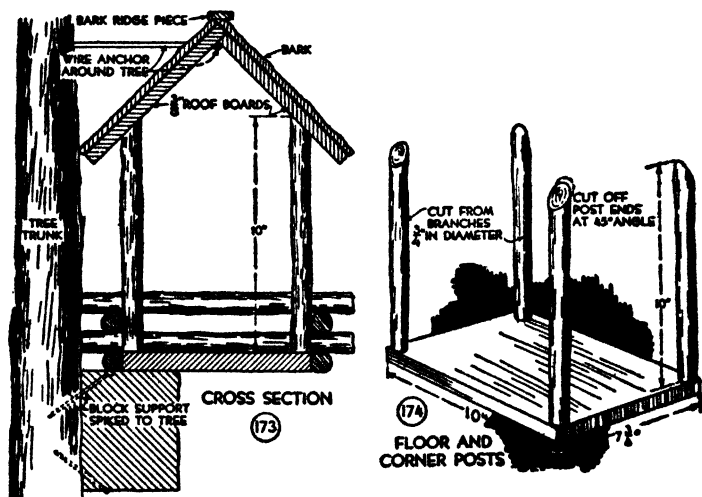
CROSS SECTION OF RUSTIC ROBIN SHELTER SHOWN IN PHOTOGRAPH FIG. 162
